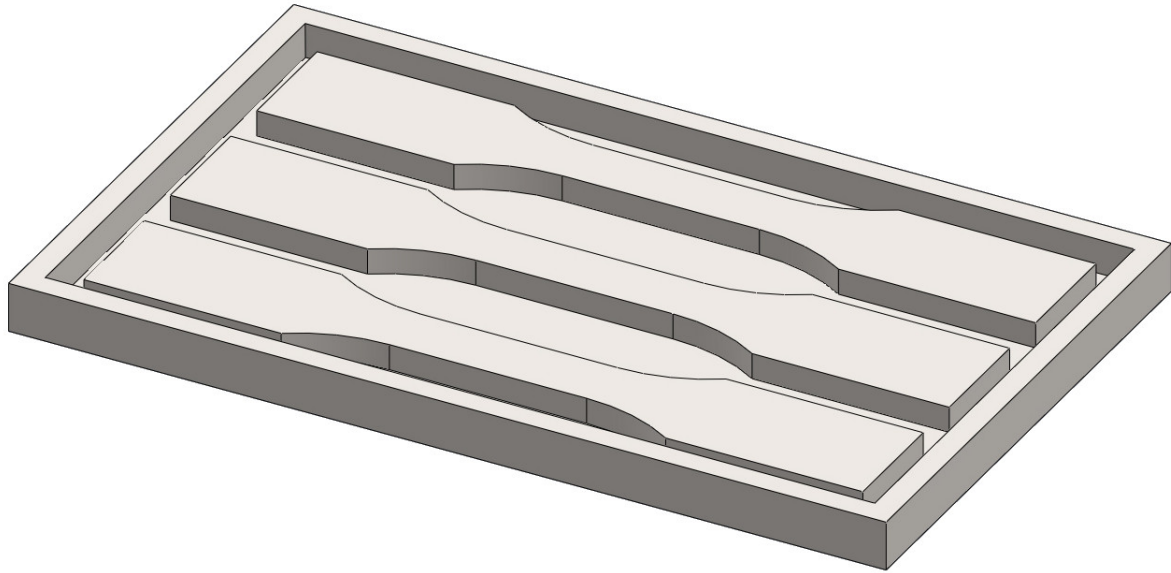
Dogbone Specimen Mold Positive. Units: mm
